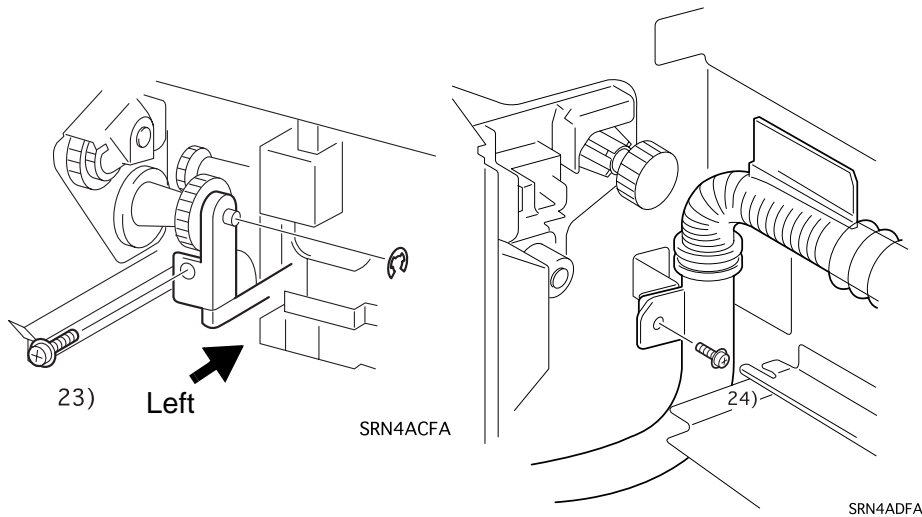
AUGER HIGH ASSEMBLY Removal (2/3)
